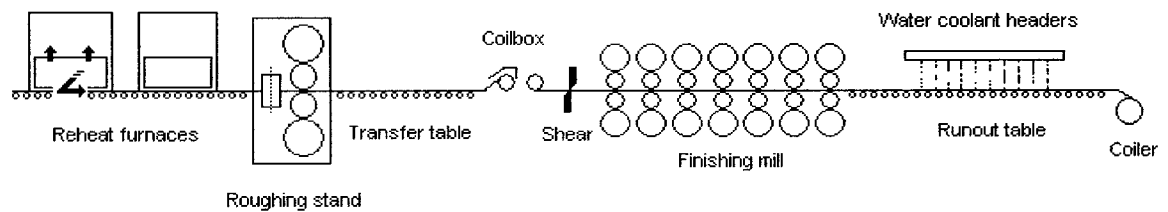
Layout of a semi-continuous hot strip mill with 1 reversing rougher
